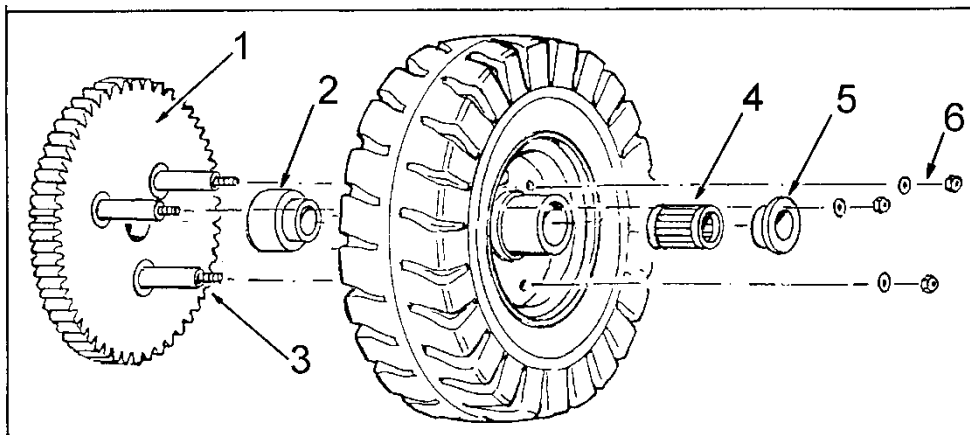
Wheel Bearing, Removing and Lubricating
